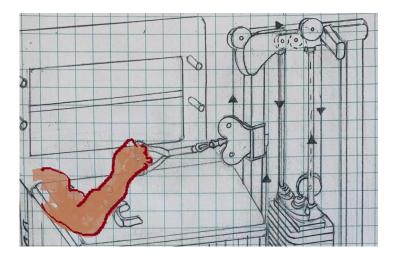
Initial Design with arm demonstrating the pulling direction of the Cable Sub-Assembly
